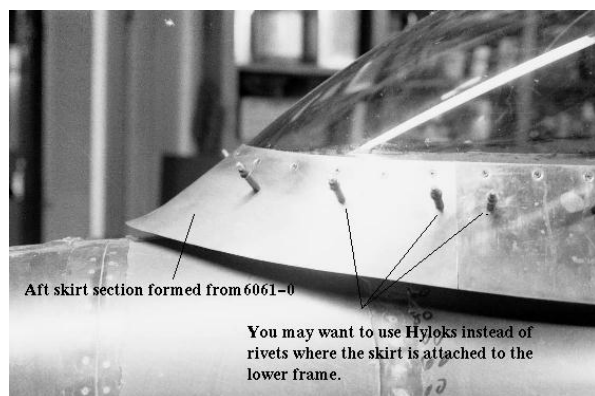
The aft part of the canopy skirt must be formed by the builder.
